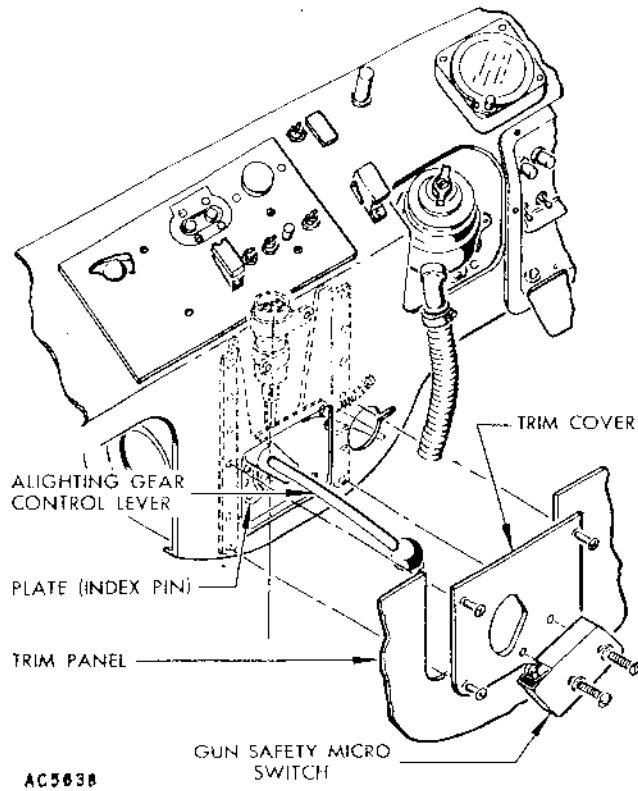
A — Alighting Gear Selector Valve Control Lever (T.O. 01-75FJA-2G-02)
